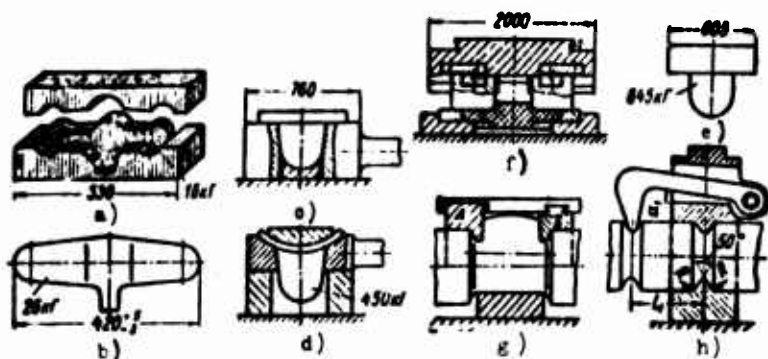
Examples of a special tool [12], [25], [26]: a) tool for forging of rocker arm; b) forging of rocker arm, obtained without application of a special tool; c) and d) tool for forging of a runner; e) forging of a runner obtained without application of a special tool; f) tool for forging of disks with a hub: upper slide hammer block and lower ring with shift inserts; g) attachment for transmission; h) attachment for fullering.
